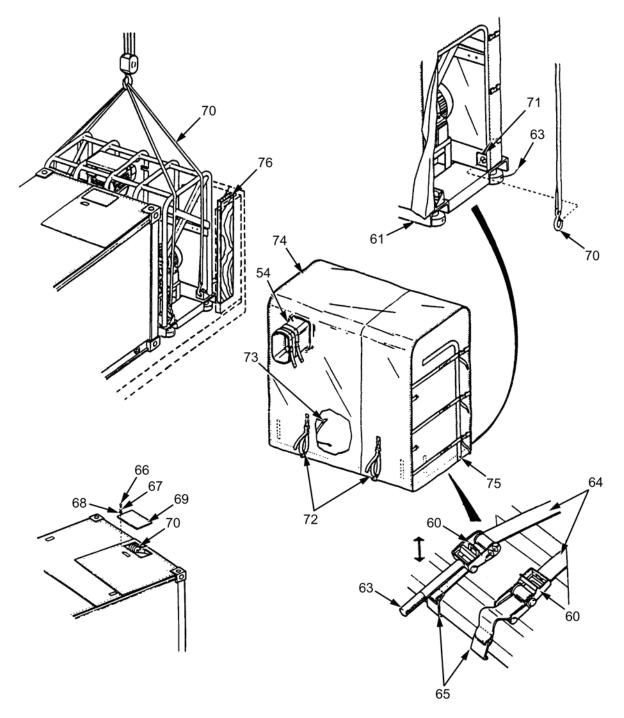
High Pressure Pump Assembly (Sheet 2 of 2).
